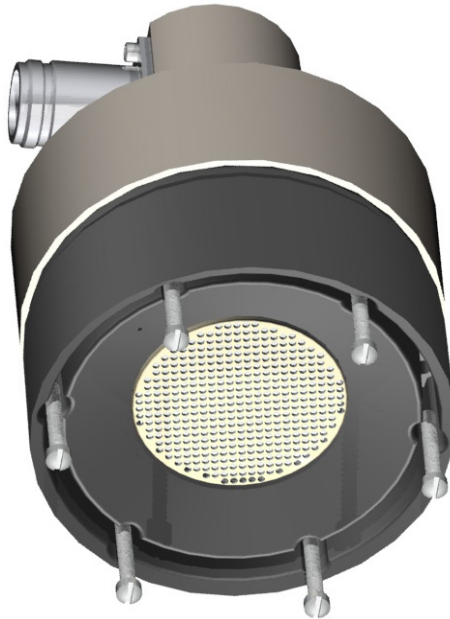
Remove Six Screws from the Transducer Housing
